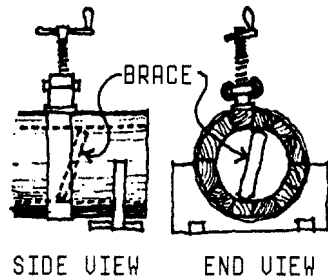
Gluing and clamping a joint. Side view showing brace wedged inside shaft. Effective length of brace can be changed by shifting the angle of the brace more or less. End view of staved shaft in cradle. Brace is holding the shaft from going out of round due to pressure from clamp.
